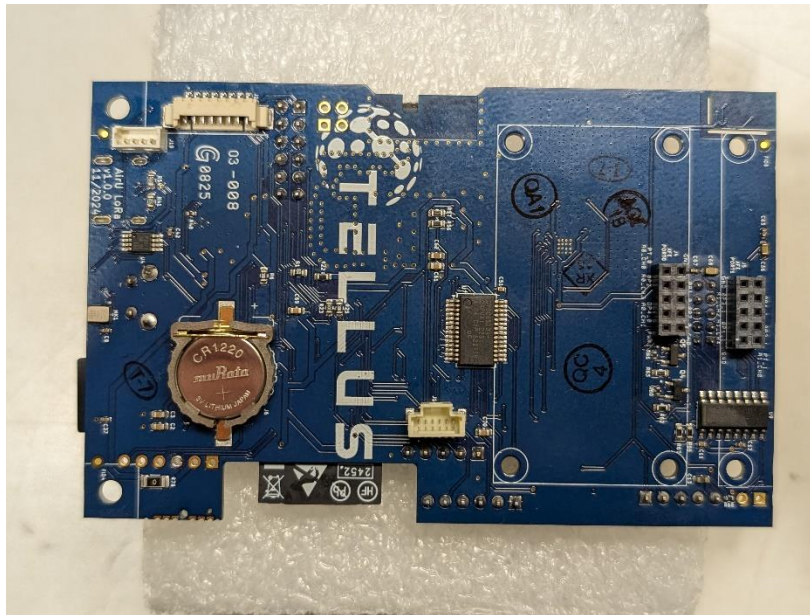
PCB Placement in Enclosure Rear Showing EUT Unfastened
